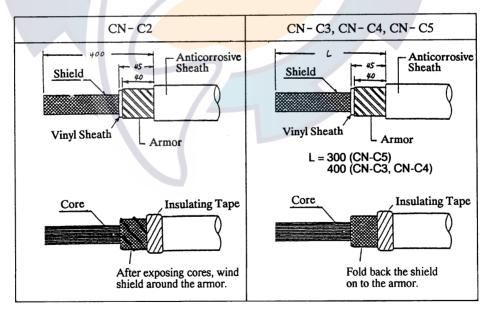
Fabricating cable 54-038-000-601/SC, 00-8016-020-000-703V
